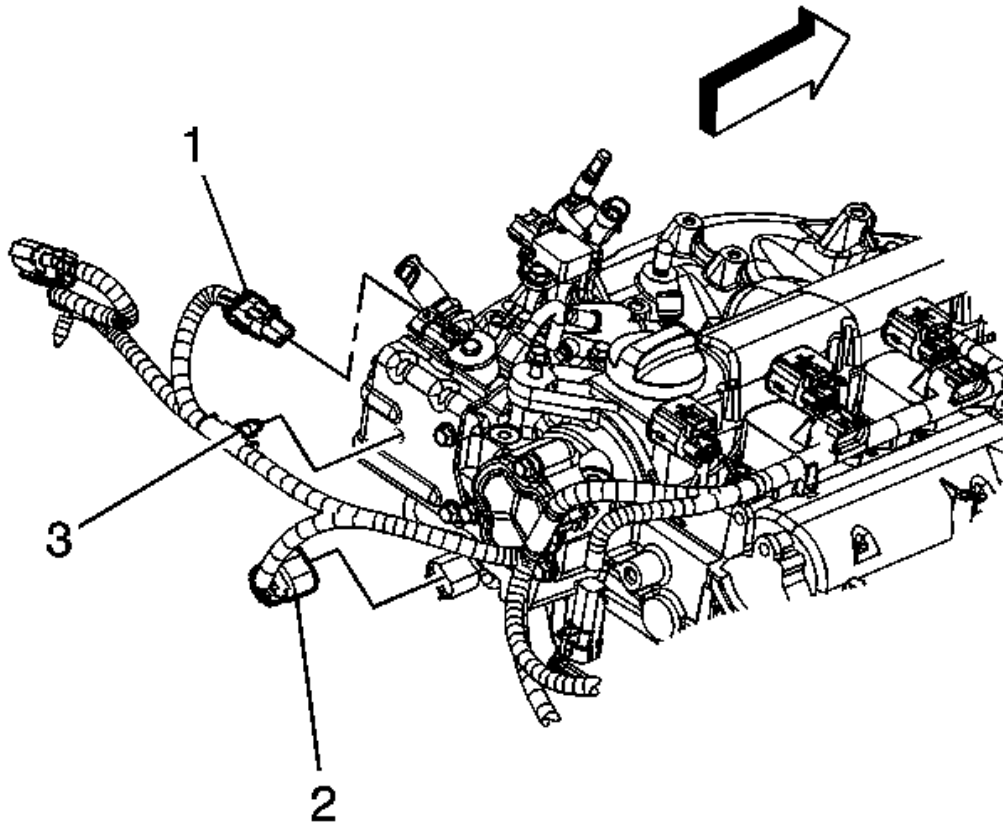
Identifying High Pressure Fuel Pump Connector & Clip
